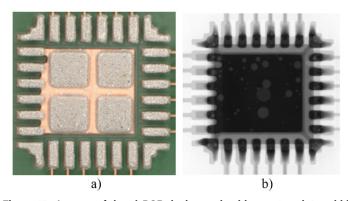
Images of the a) PCB design and solder paste print and b) post-SMT assembly X-ray for the 4x4 mm QFN test vehicle two. Note typical voiding on the exposed pad.
